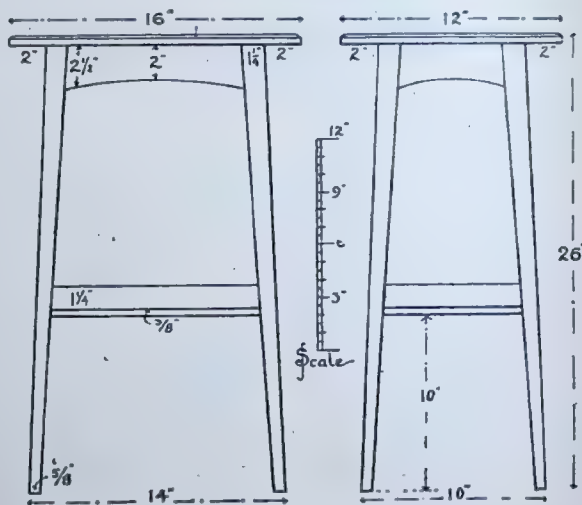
FRONT ELEVATION. FIG. 3.—END VIEW.
